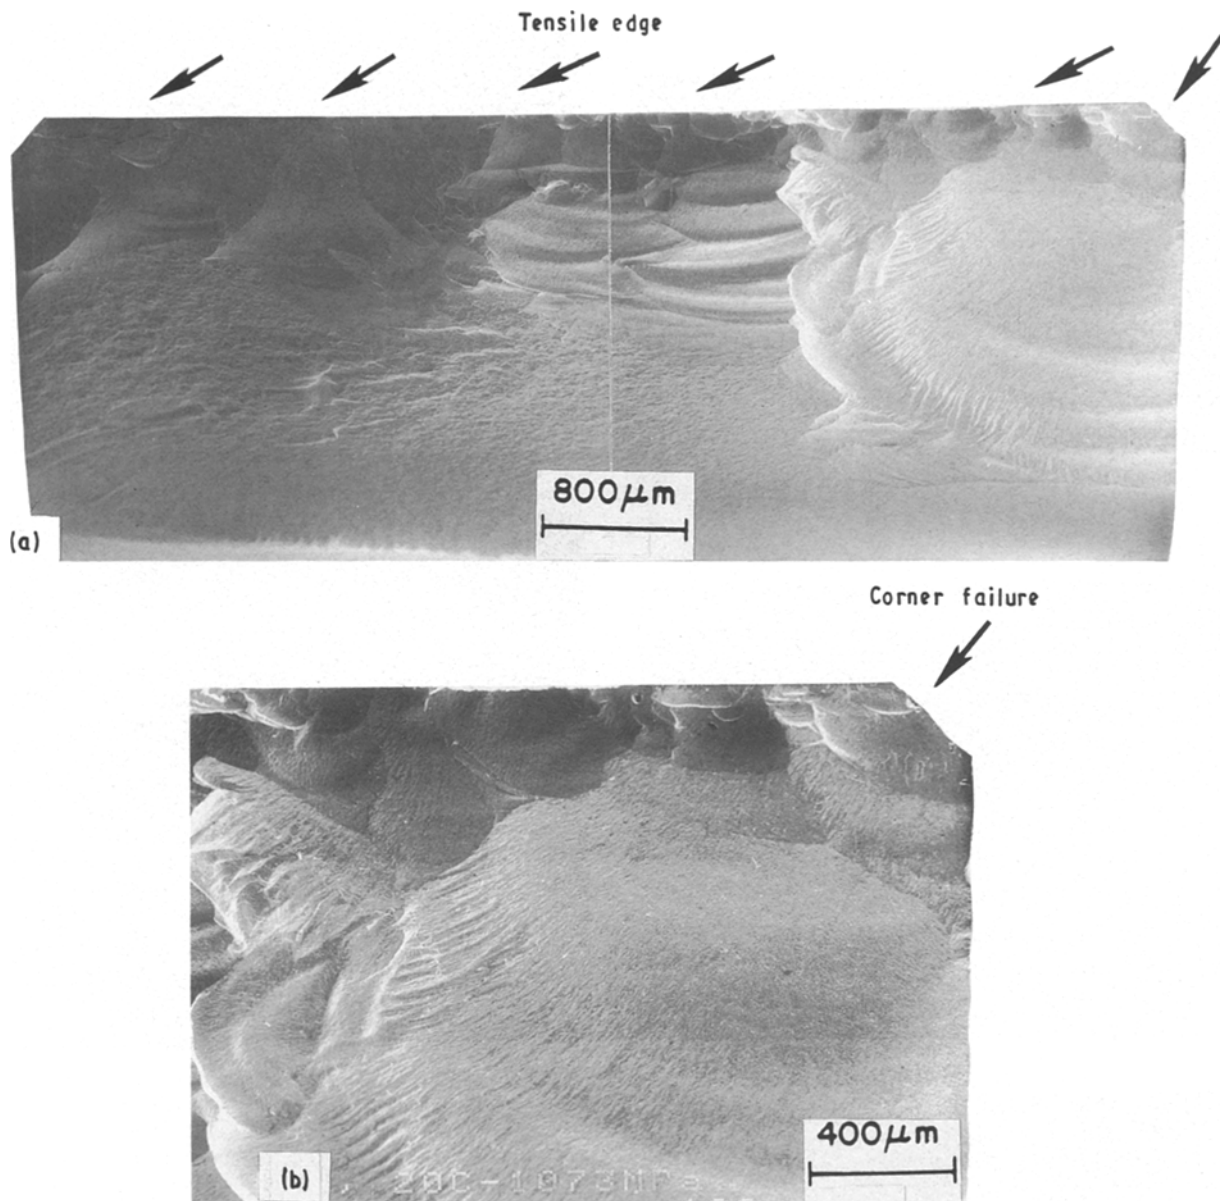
SEM fractographs showing failure initiation at a chamfered edge in a Super PSZ specimen at 20 °C, 1073 MPa.
